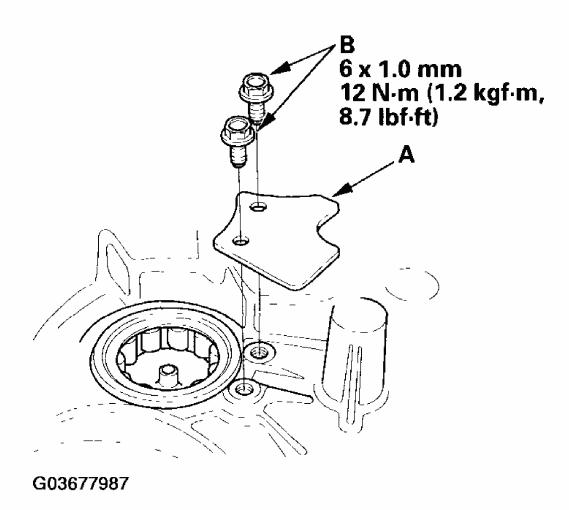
Installing Bearing Set Plate With Bolts And Torque Specifications Courtesy of AMERICAN HONDA MOTOR CO., INC.
